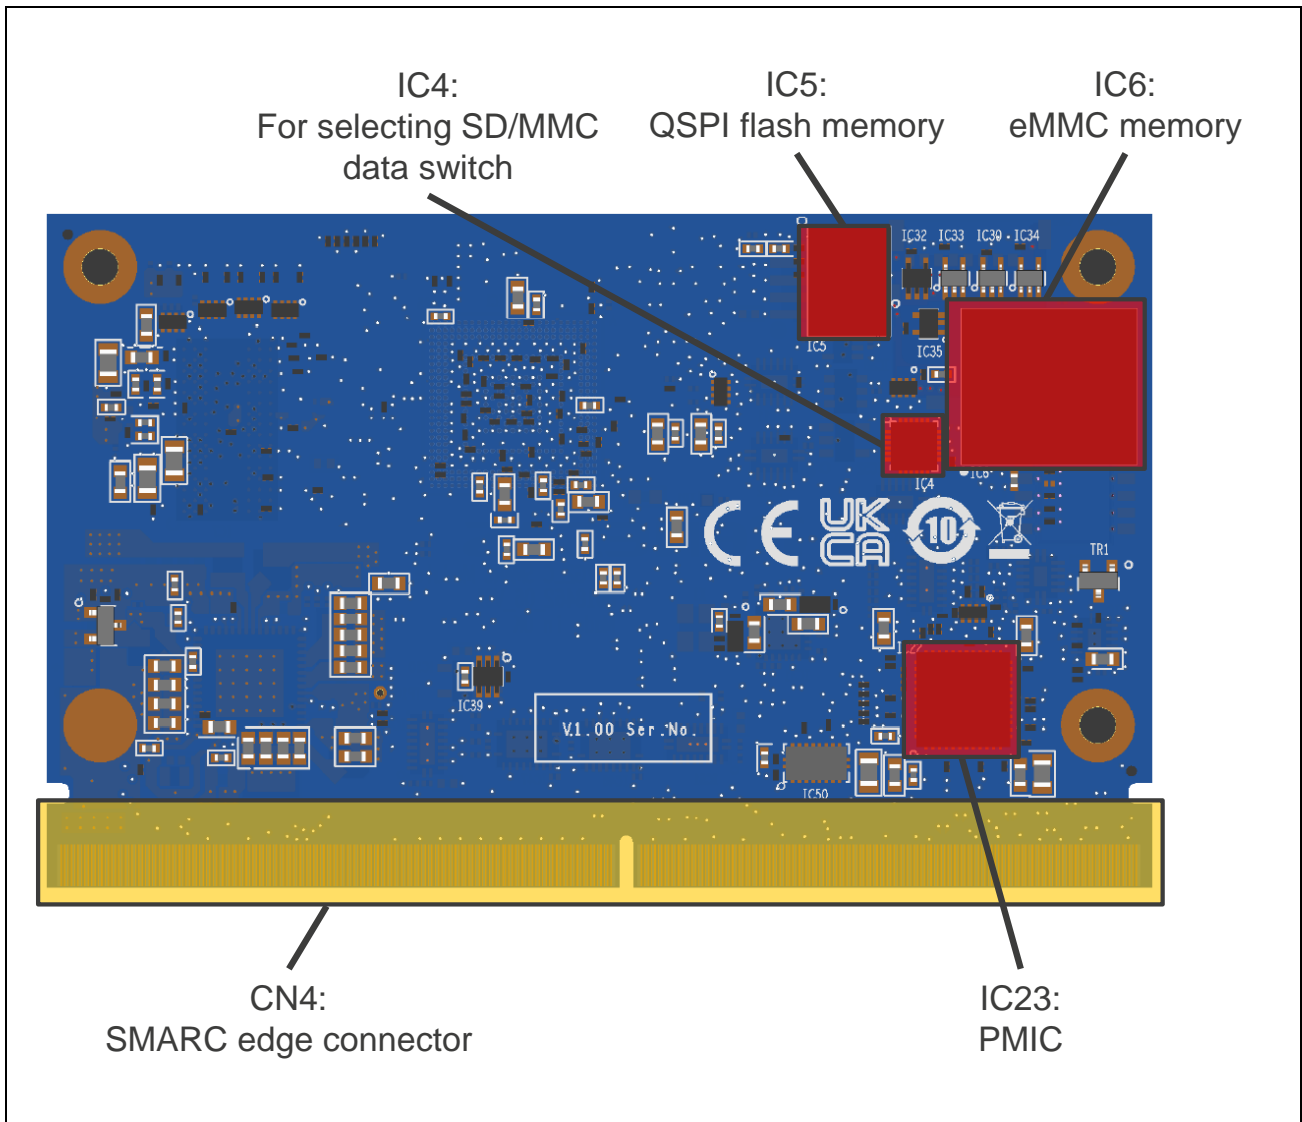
Layout of Components of RTK9744C22C01000BE (Bottom View)
